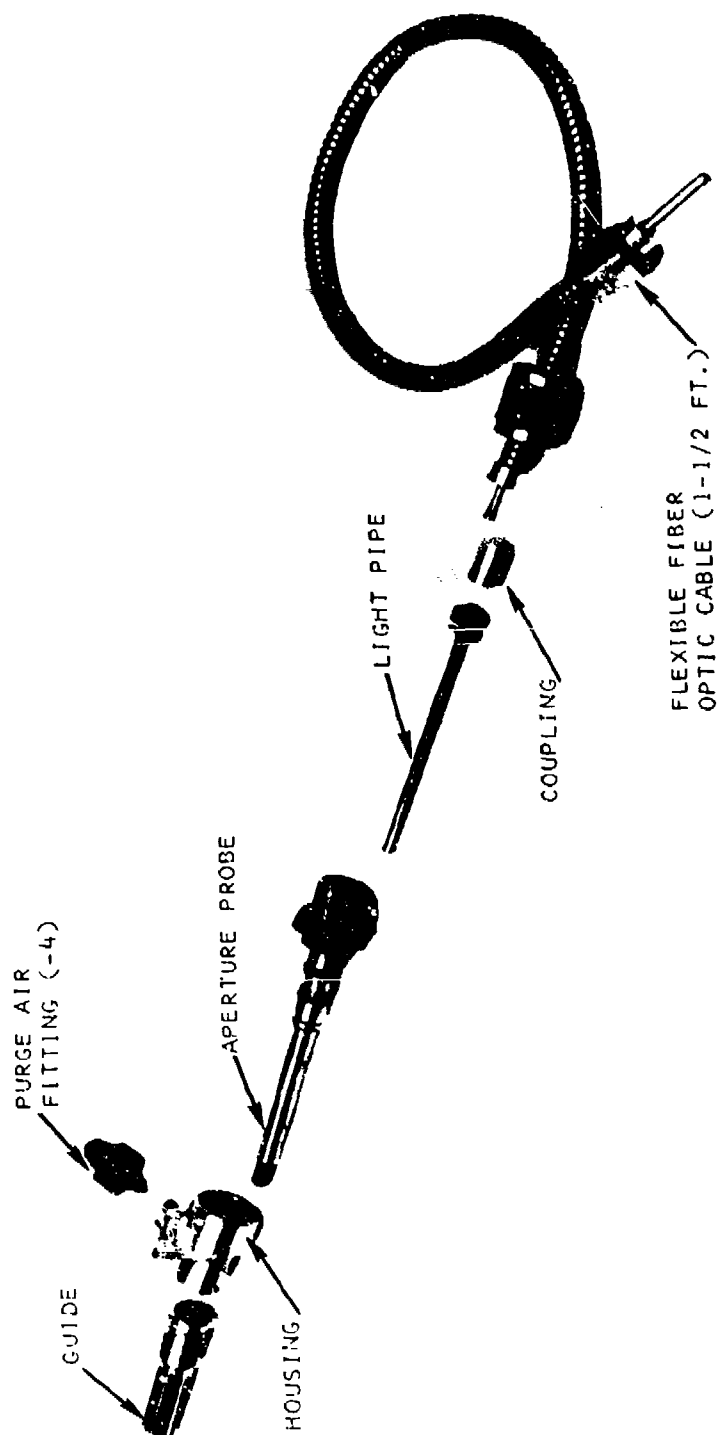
RADIATION PYROMETER DISASSEMBLED
